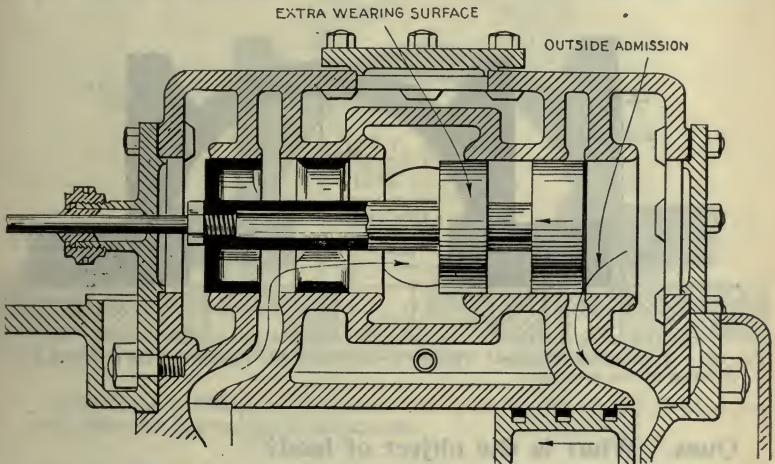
Sectional view of Phoenix cylinder showing double disc piston valve. The valve admits steam from the ends, the valve casing being surrounded by live steam. The two inner discs provide extra wearing surface.
